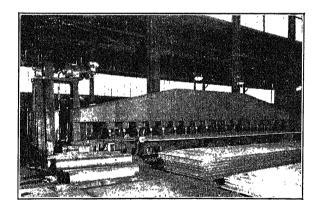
36-FT. PLATE PLANER WITH TWO PLATES IN POSITION FOR MACHINING BEVEL ON 30-FT. SIDE
